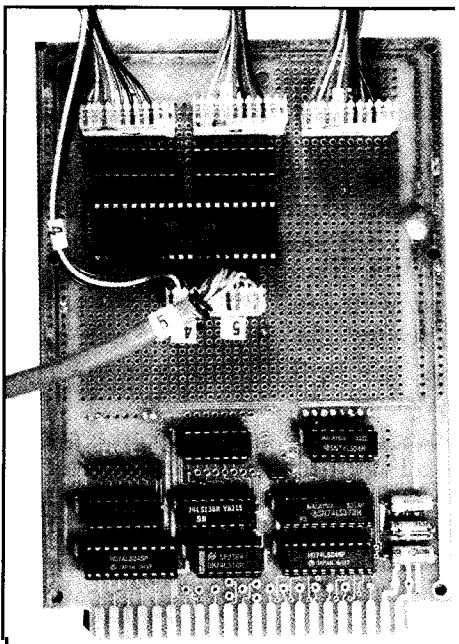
The stepper motor driver circuitry shown in Figure 2 is mounted on a BCC55 Proto Board.
